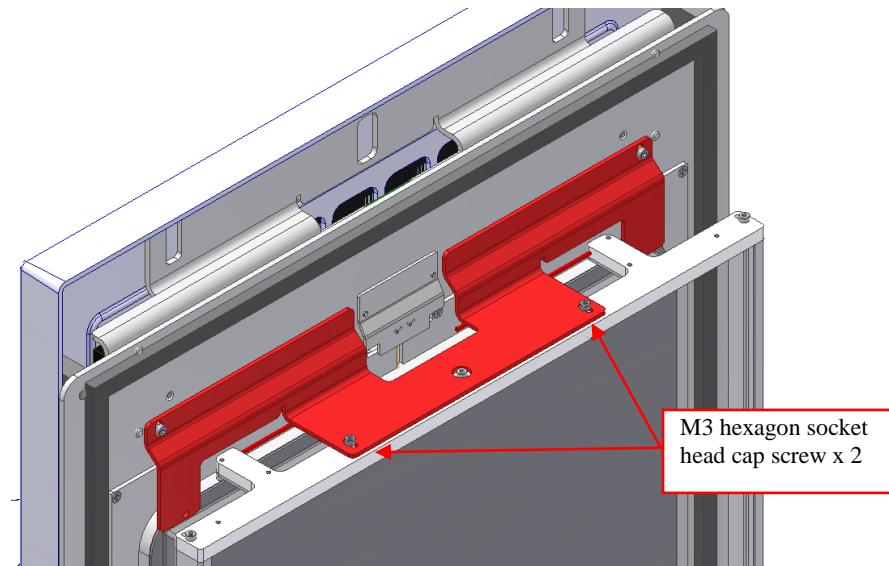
7 Removal of Door and Mapping Holding Bracket 2
